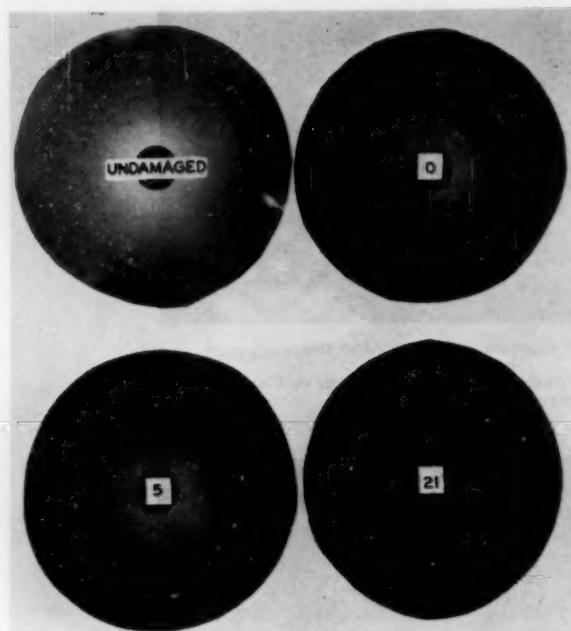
ANNEALED BRASS—DAMAGED 30 MIN—DEPTH OF LAYER REMOVED AFTER DAMAGE IS SHOWN IN MICRONS
